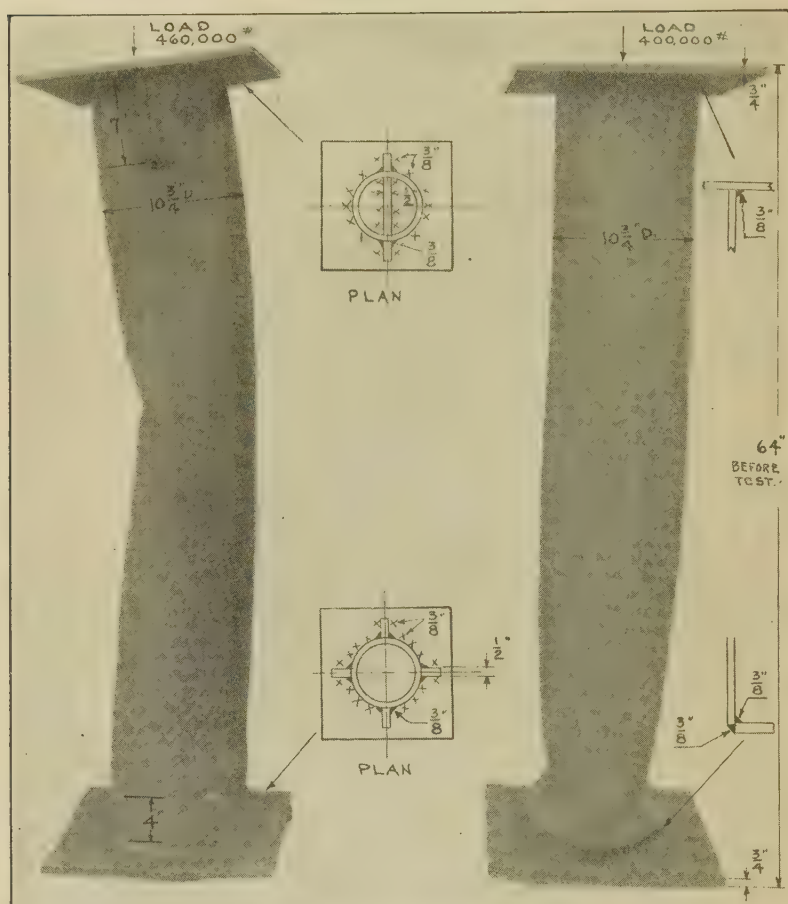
Shear and compression tests of typical welded pillar connections used in ship construction.
